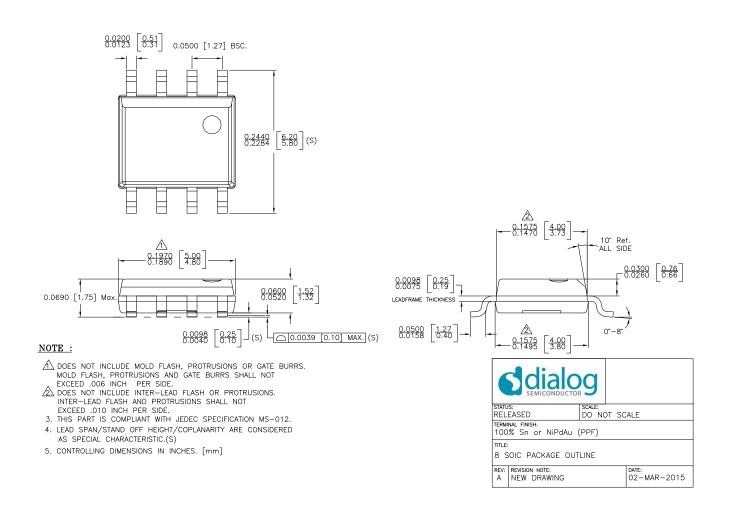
Physical Dimensions of 8-Pin SOIC Package
